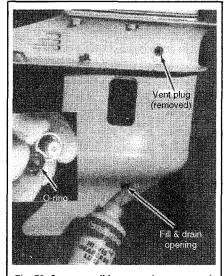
Gearcase oil is pumped or squeezed into the lower unit through the filler opening, while the vent opening is removed to let air escape
